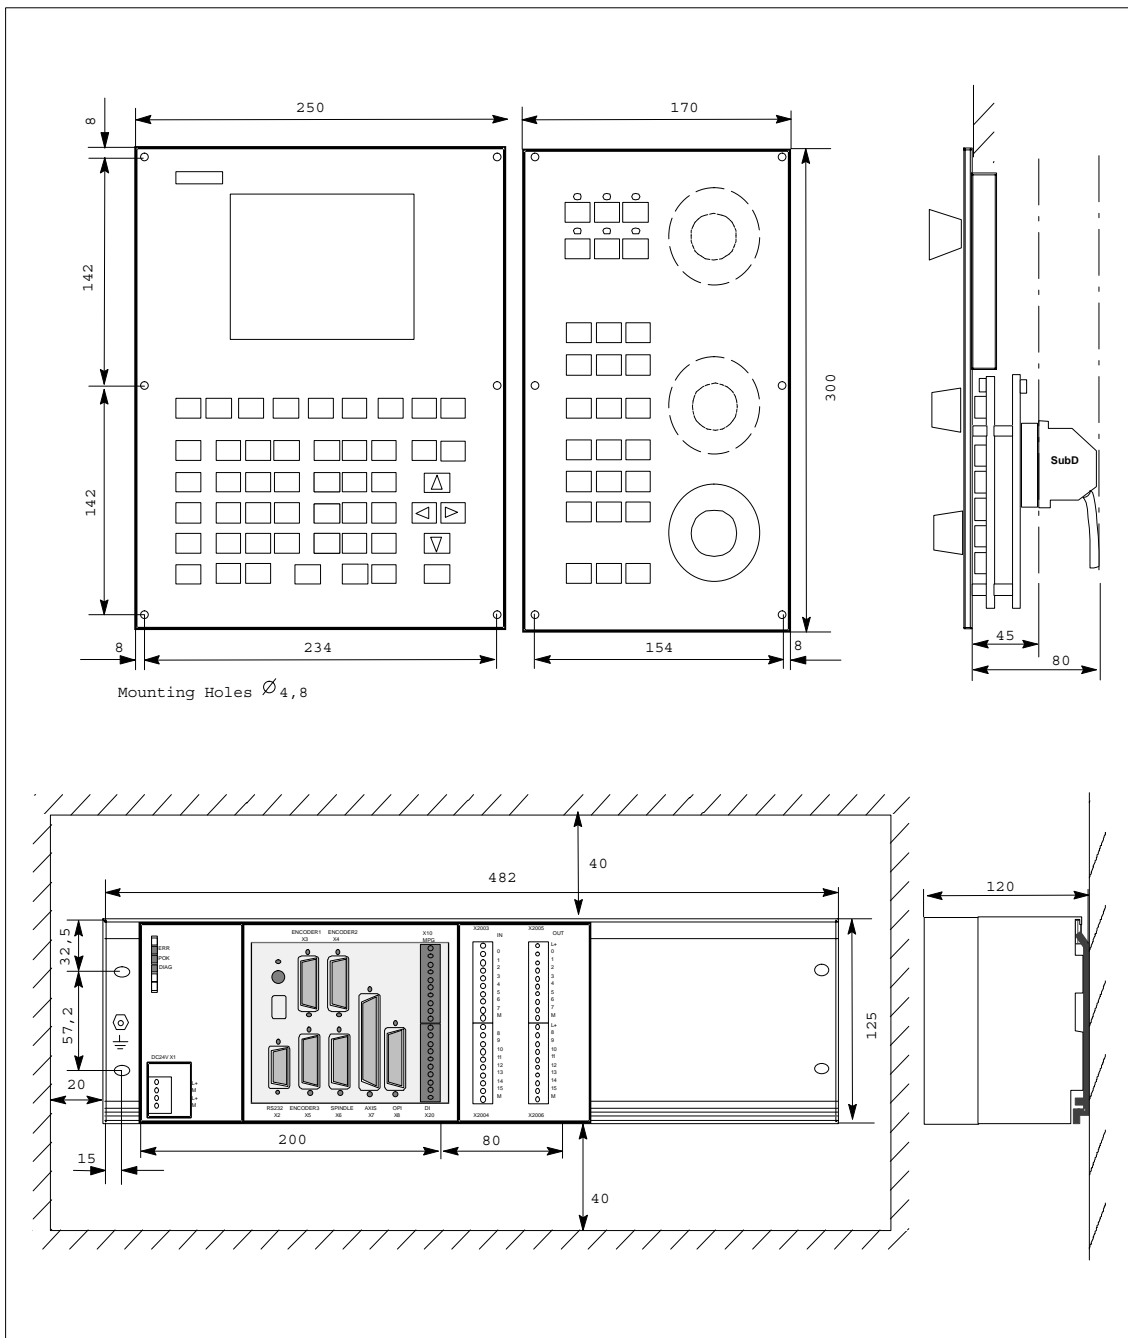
Mounting dimensions for SINUMERIK 802S
